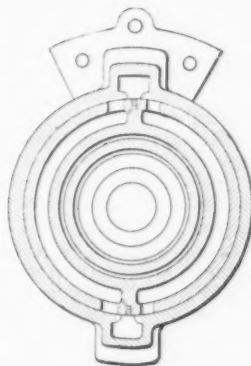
Vertical Sectional Detail of Steam Chest and Valve Mechanism.
